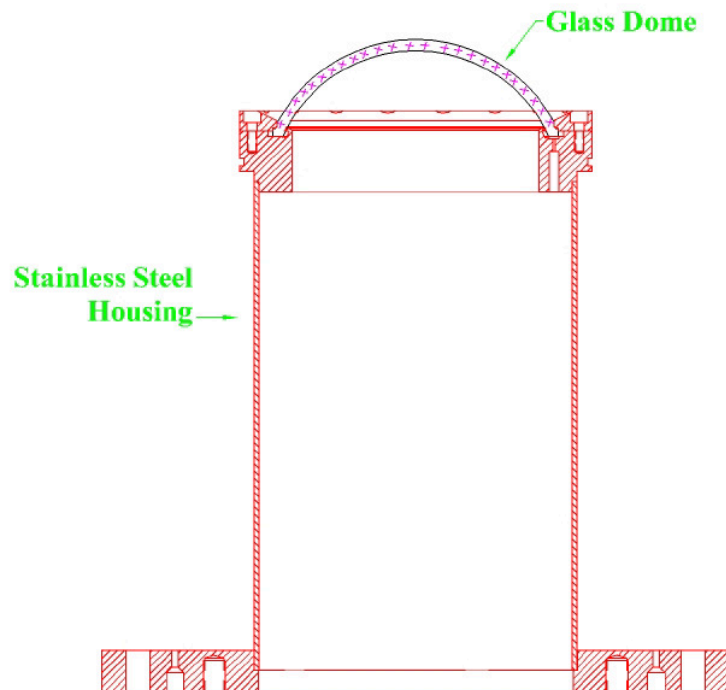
Drawing of camera housing, which is mounted on the SSS. The camera assembly is installed from the rear, and sealed with a flange. This method allowed us to have access to the cameras until the detector starts to fill with liquid.
